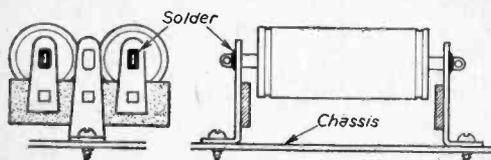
The 8 and 25μF condensers are soldered to tag strips for mounting on the chassis.
